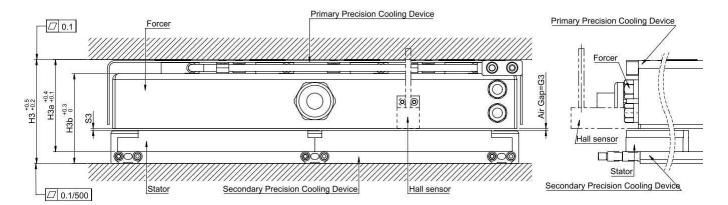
LMFA precision water-cooling linear motor assembly
